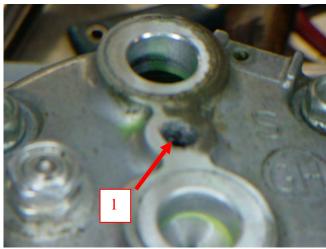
Threads stripped at hose connector bolt (Ref. 1).
